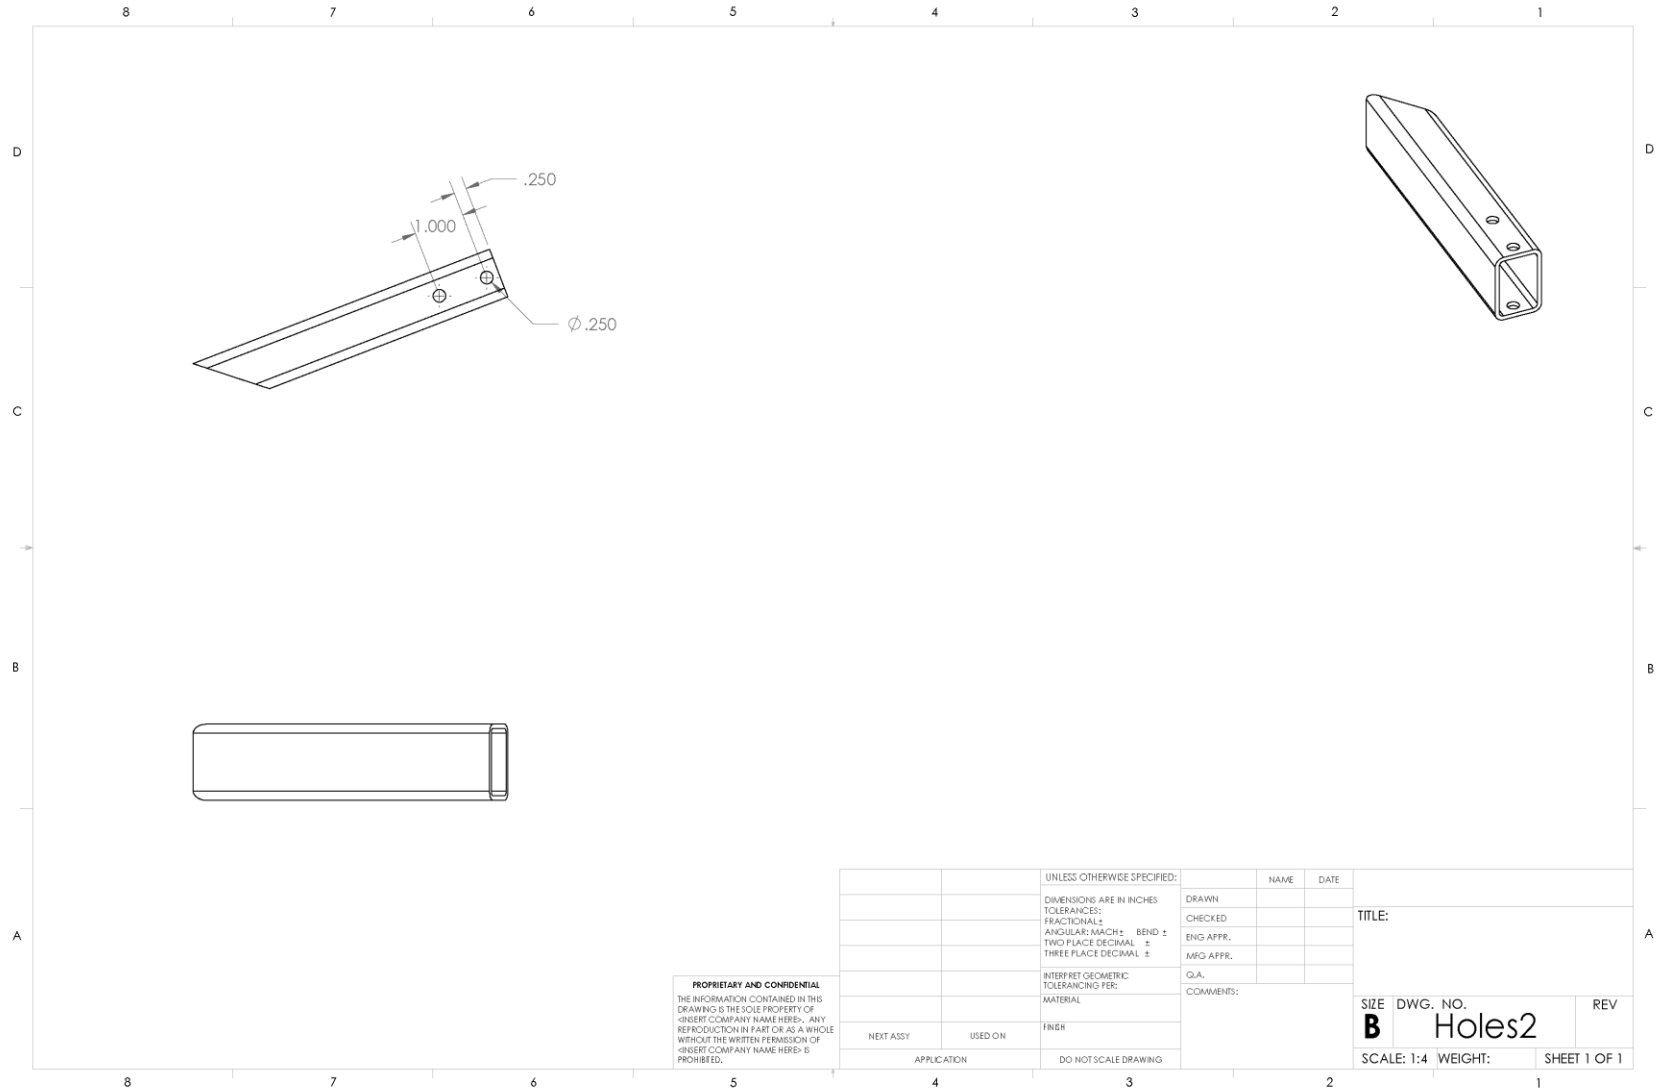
Drawing of Part 1210 with Holes for Mounting U-Bolts
